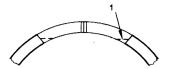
TYPICAL LOCATION OF TEST PIECES
